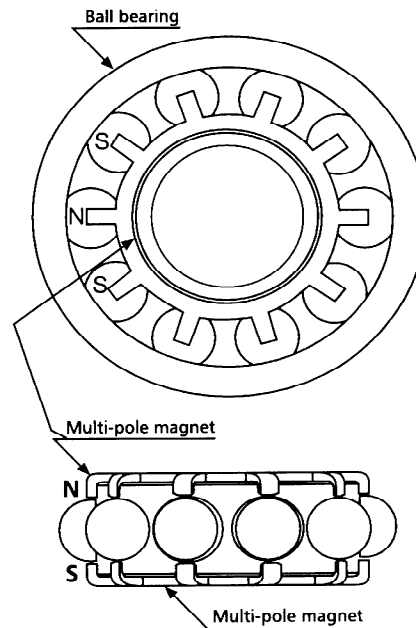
Ball Bearing with Magnetic Ball Separator [4]
